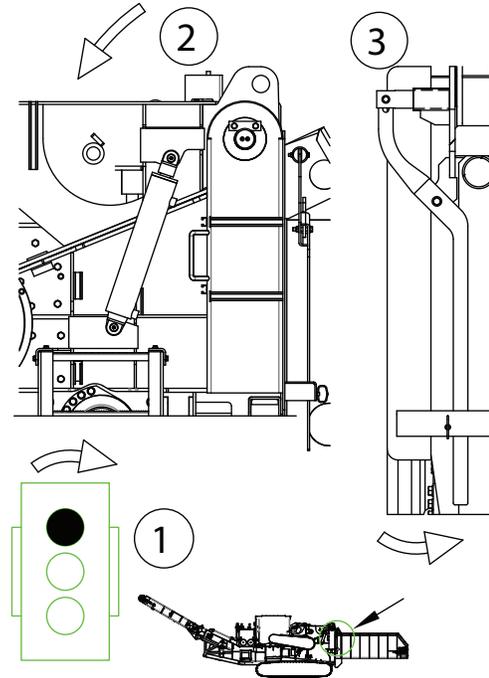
Remove Locking Pin (6400/6800 Series)
